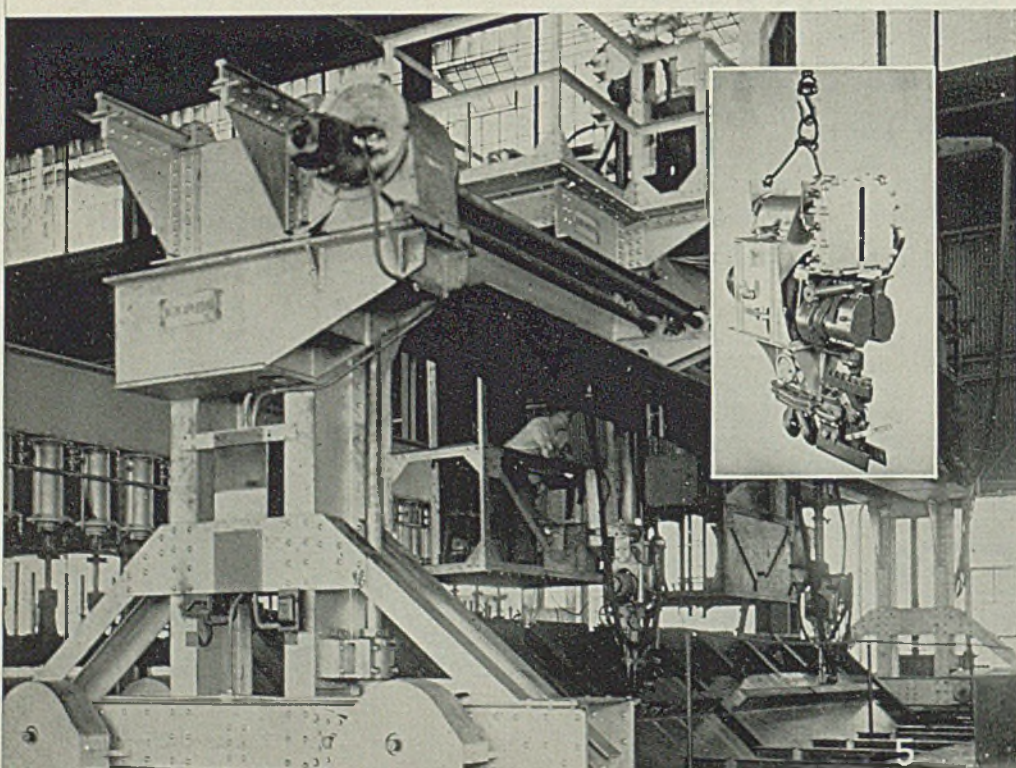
Large automatic welding equipment uses head shown in inset, welds at currents up to 4000 amperes
